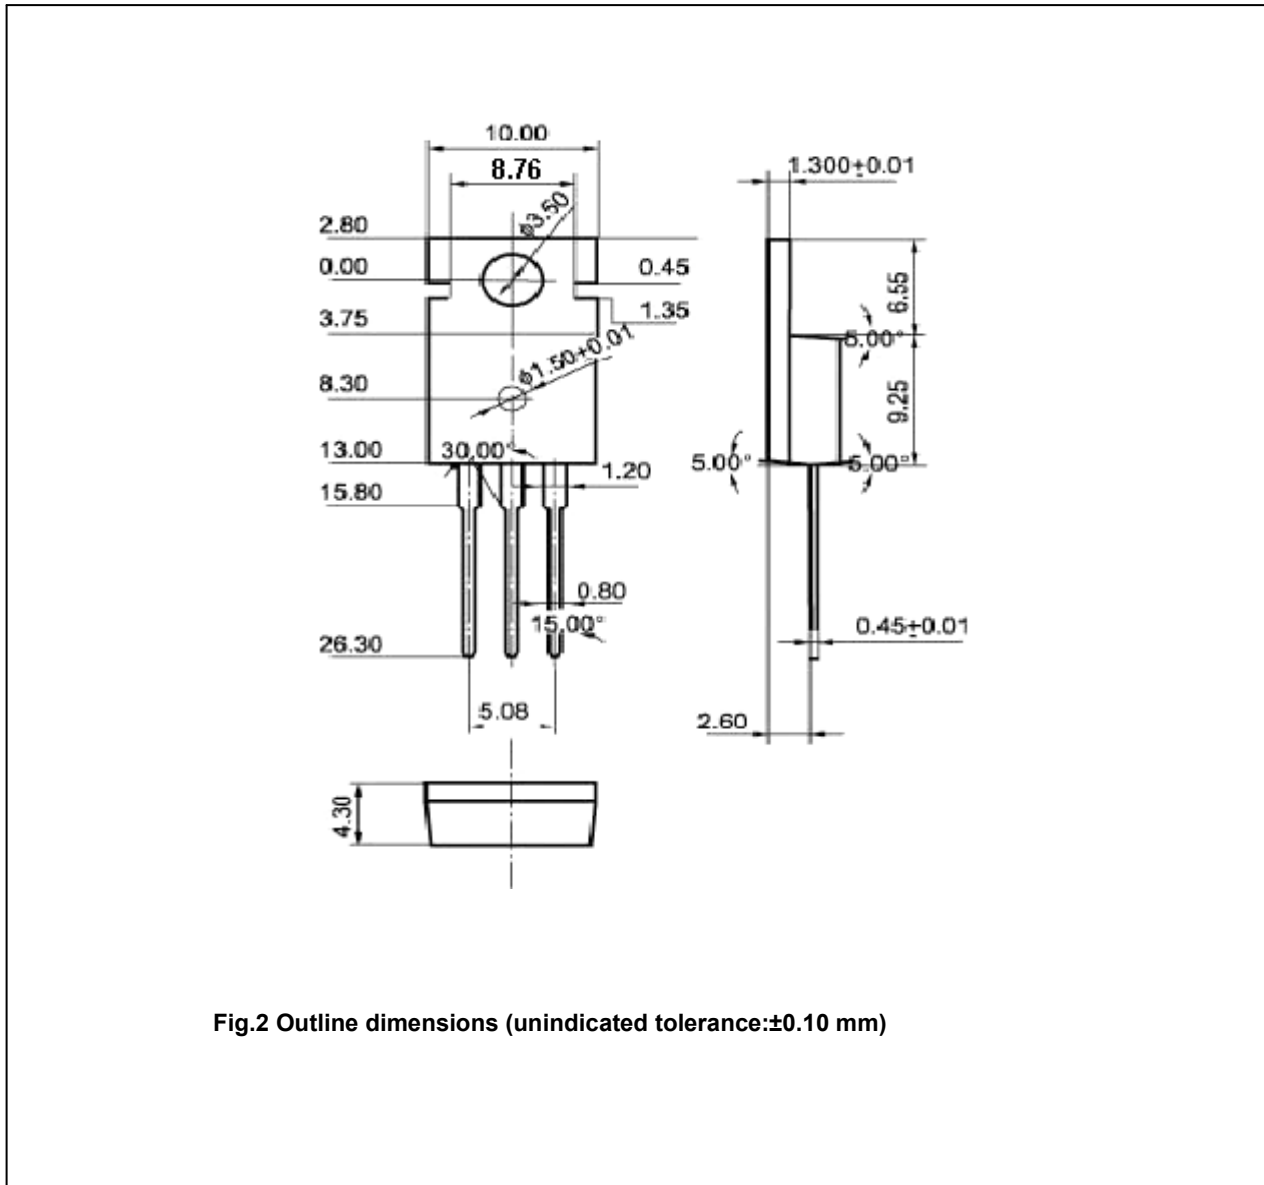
Outline dimensions (unindicated tolerance:  $\pm 0.10$  mm)
